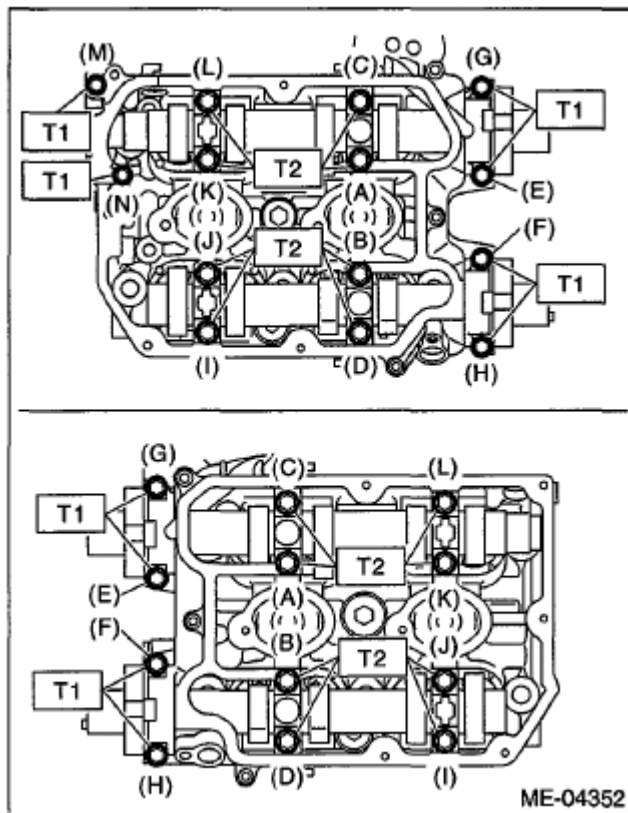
Identifying Camshaft Cap Bolts Tightening Sequence
